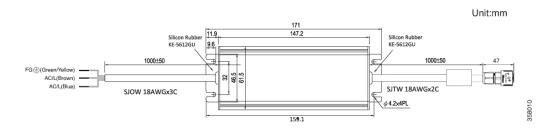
AIR-PWRADPT-RGD2 Dimensions (Side View)
